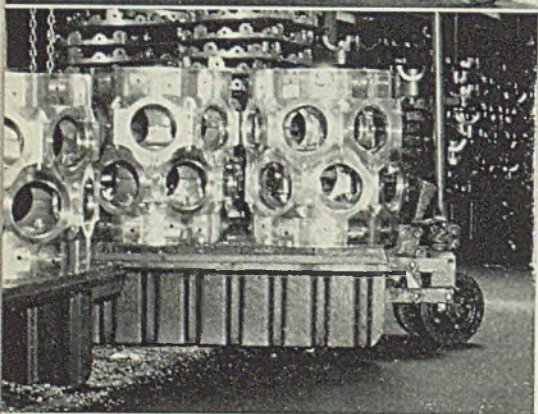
(Upper view)—Typical racks employed to transport parts to assembly line. Fig. 11—Wood-faced steel skids and lift trucks move heavy crankcase sections. Note lower view
